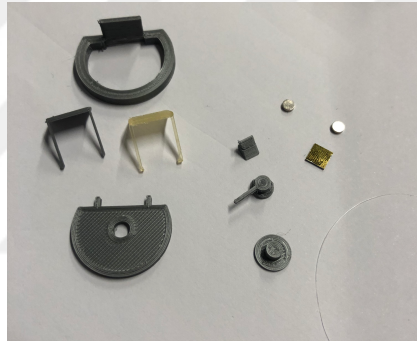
Manufactured parts of the rotary actuator with external parts
